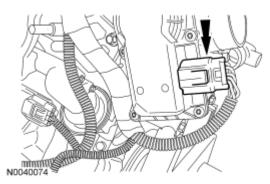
Locating Electronic Throttle Body Electrical Connector Courtesy of FORD MOTOR CO.
